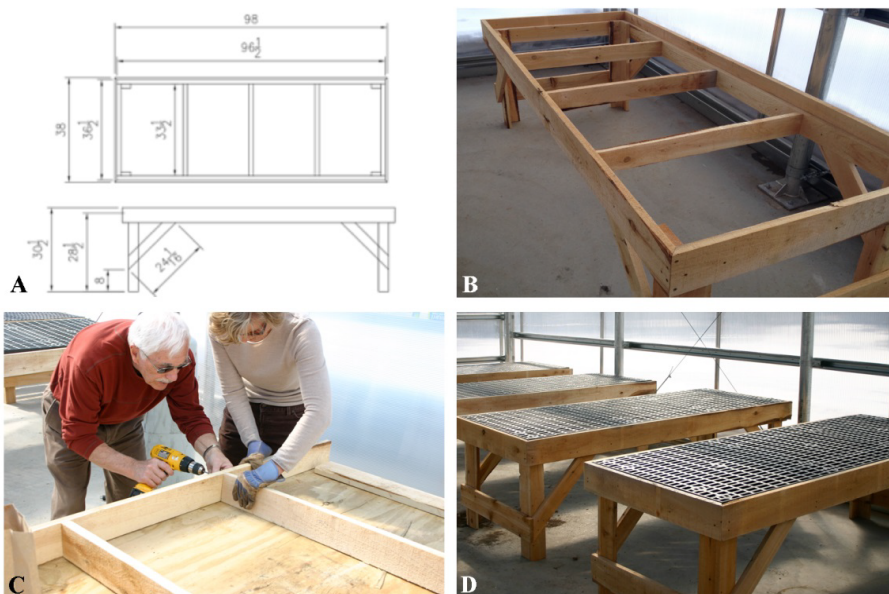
Greenhouse benches. A. Design illustrating top view and side view. B. Completed frame of greenhouse benches. C. Community members building initial benches. D. Completed benches.
